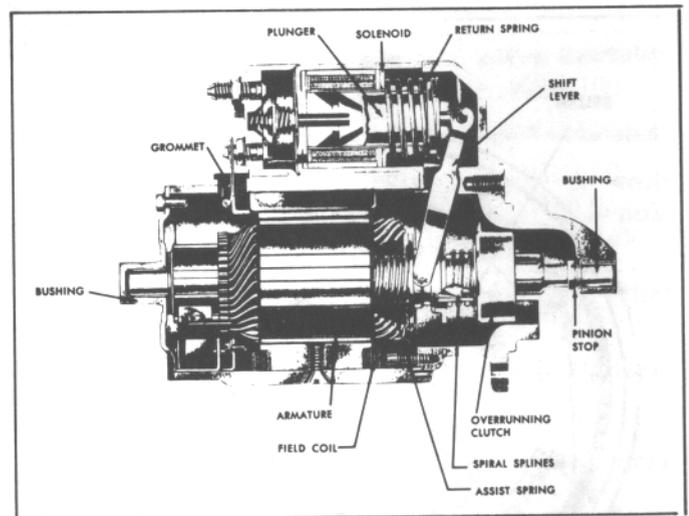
Sectional View of Enclosed Shift Lever Type Cranking Motor
